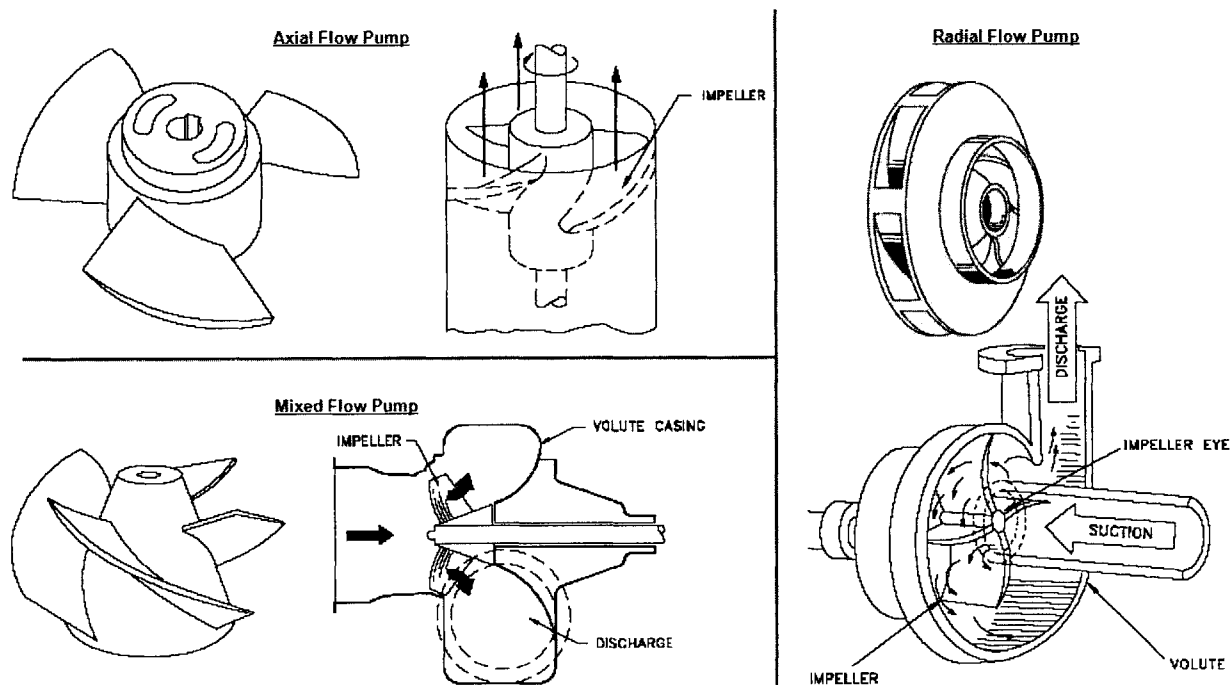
Centrifugal Pump Categories with Impeller Details [13]
